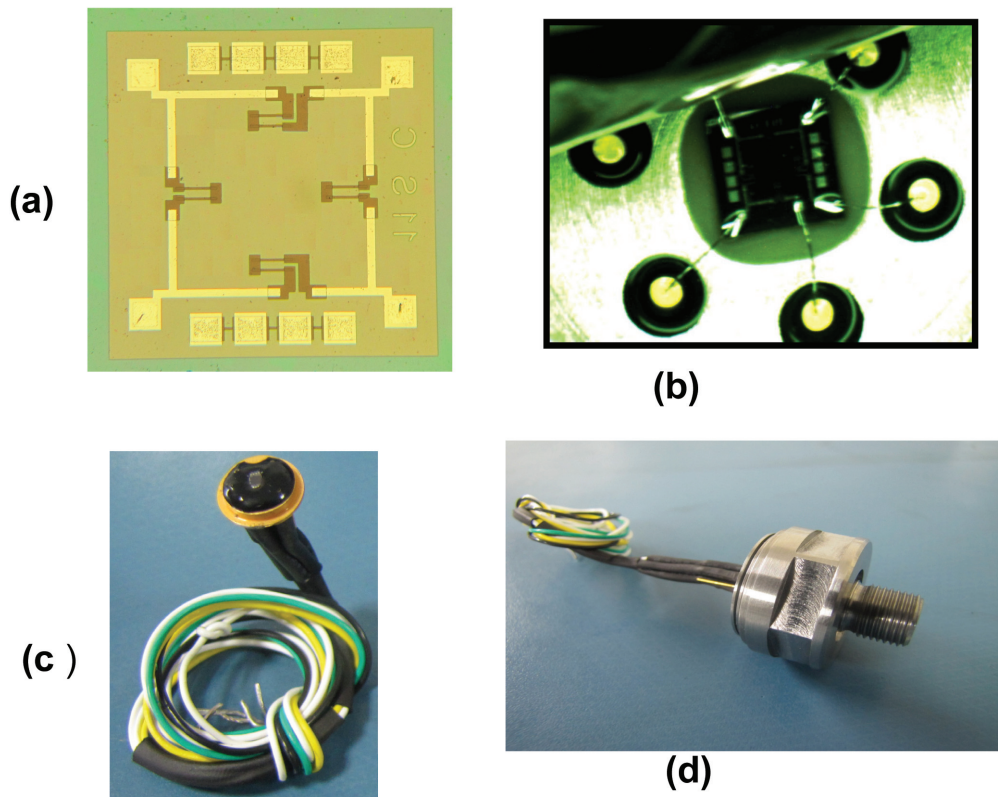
Photographs of a 400bar piezoresistive pressure sensor fabricated at CeNSE, showing (a) the chip (b) chip mounted on header and wire bonded (c) wire connected to the electrical port of the package showing the chip in position (d) completed package with pressure port and electrical connection.
